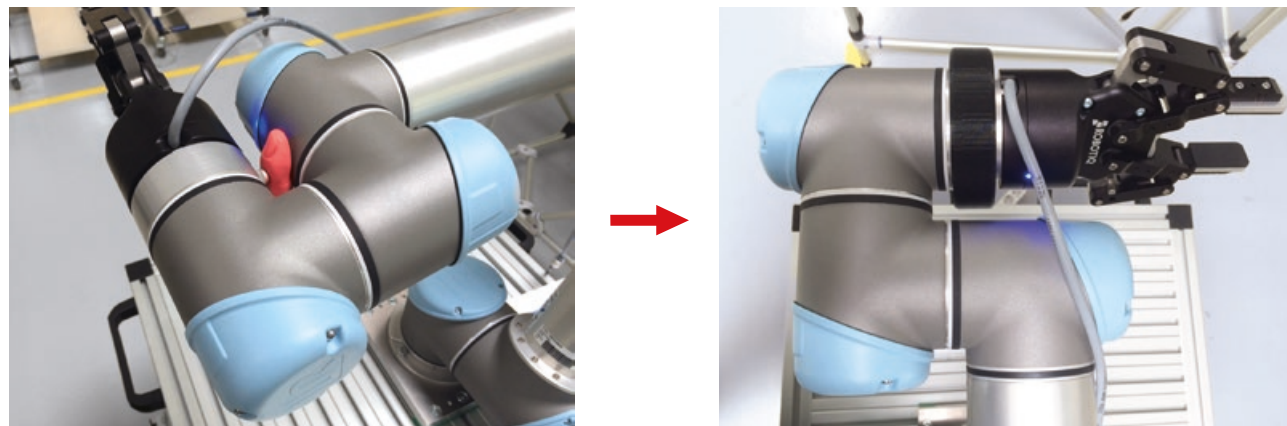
left: Checking a crushing point on a workpiece flange with a safety finger, right: Protection with a protective ring
